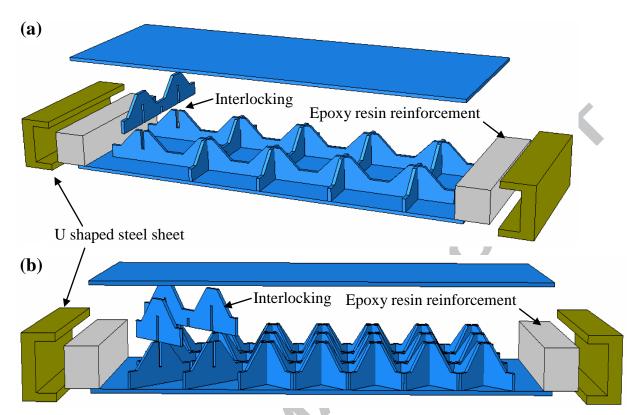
Fabrication of sandwich beams with 3D honeycomb cores for three point bending tests by using cut carbon fiber reinforced composite sheets and interlock method: (a) Egg honeycomb cores; (b) Pyramidal honeycomb cores.
